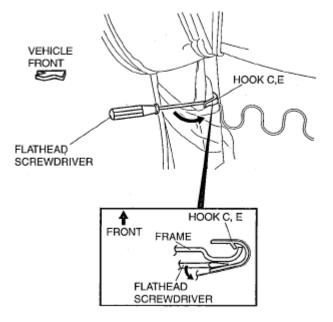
Identifying Fastener And Hook Courtesy of MAZDA MOTORS CORP.
